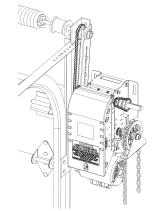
Right Side Wall Mount (Chain Hoist on Right)
